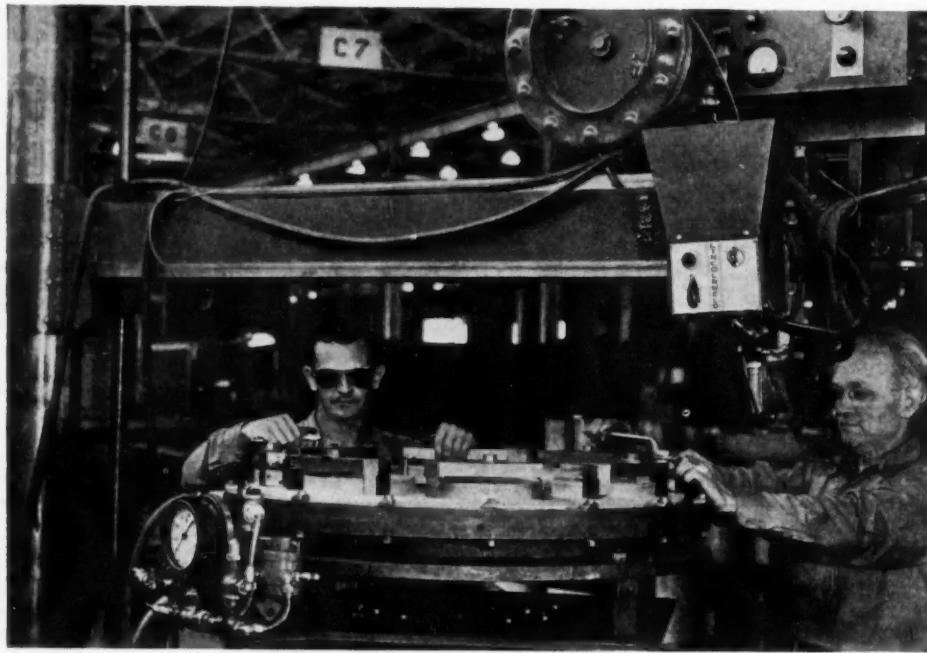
This heavy jigging for the aft frame support flange for the General Electric J-47 turbojet is typical of the tooling needed to prevent shrinkage and warpage of such parts during welding
